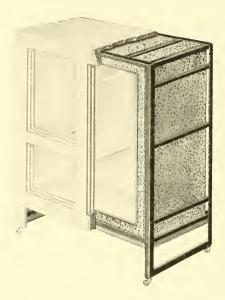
CAVALIER REFRIGERATOR, SHOWING CONSTRUCTION.
